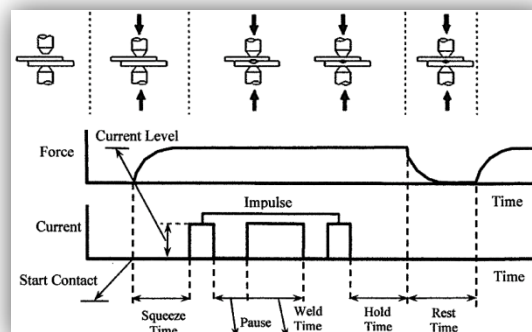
The schematic diagram of Welding process used in this study [46].
